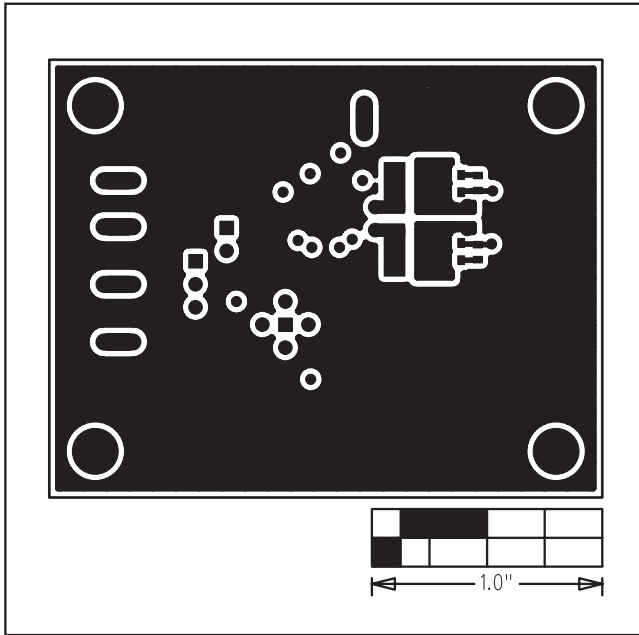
MAX9705B EV Kit PC Board Layout—Solder Side
